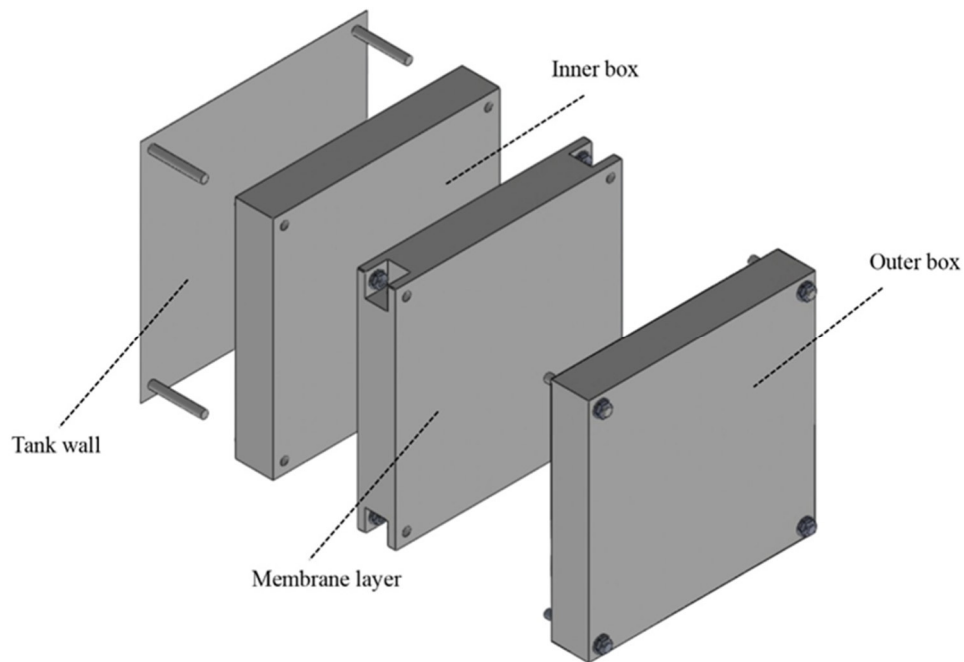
Exploded view of the NIC_20 modular unit with inner and outer steel boxes and membrane
